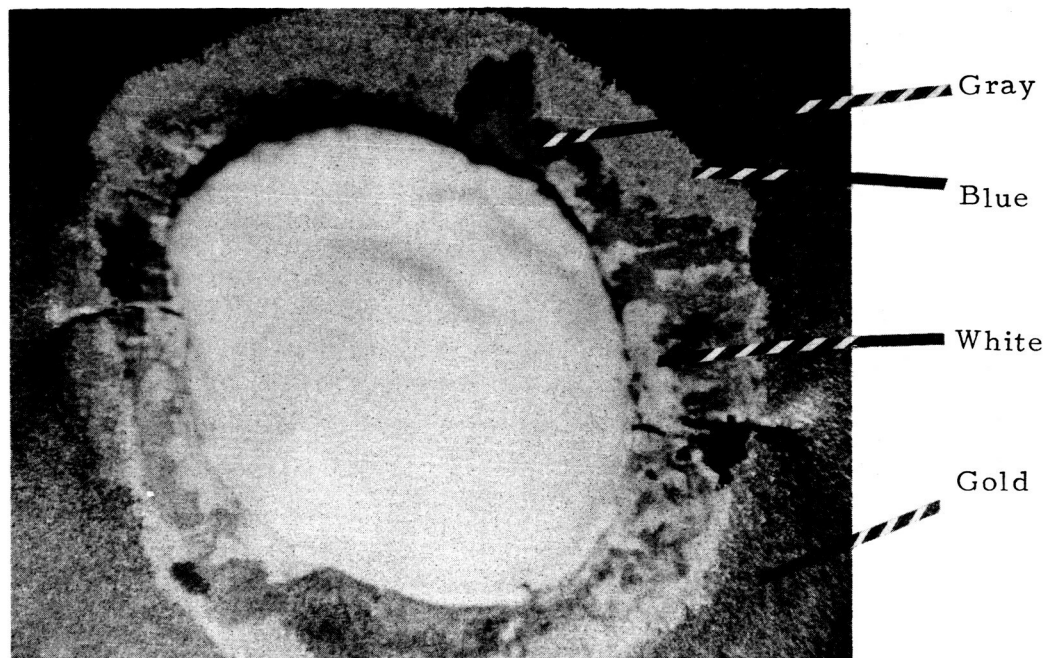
CRACKING IN THE VICINITY OF THE SOLID BEAD
